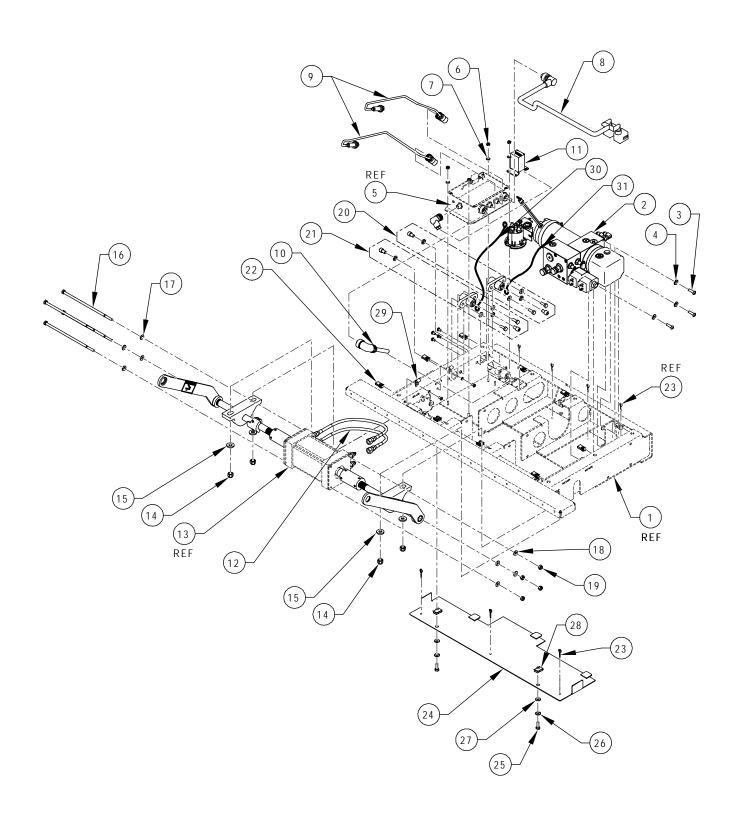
BR2C-SERIES ENCLOSURE ASSEMBLY
